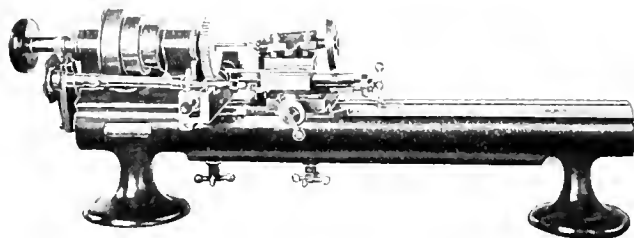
Thread Milling Attachment used on Precision Lathe built by Hardinge Bros.
